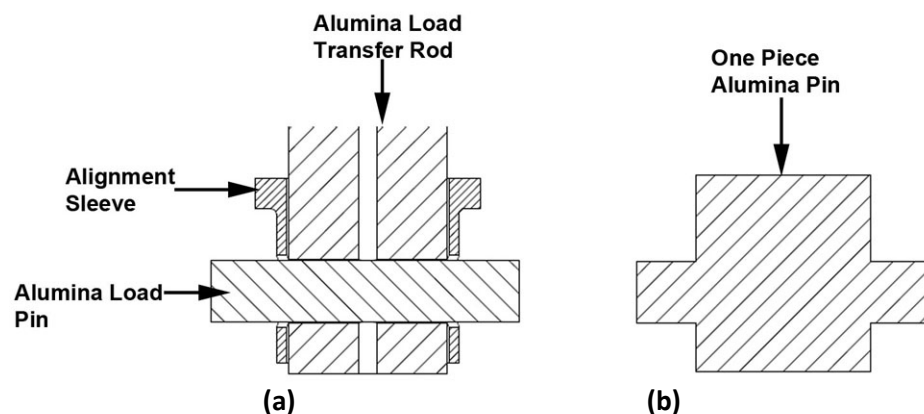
CAD drawings showing cross-sections of the (a) actual alumina load pin and load transfer rod connection and (b) the simplified alumina pin connection which was used to model the stress within the grip material contacting the alumina load pin.
